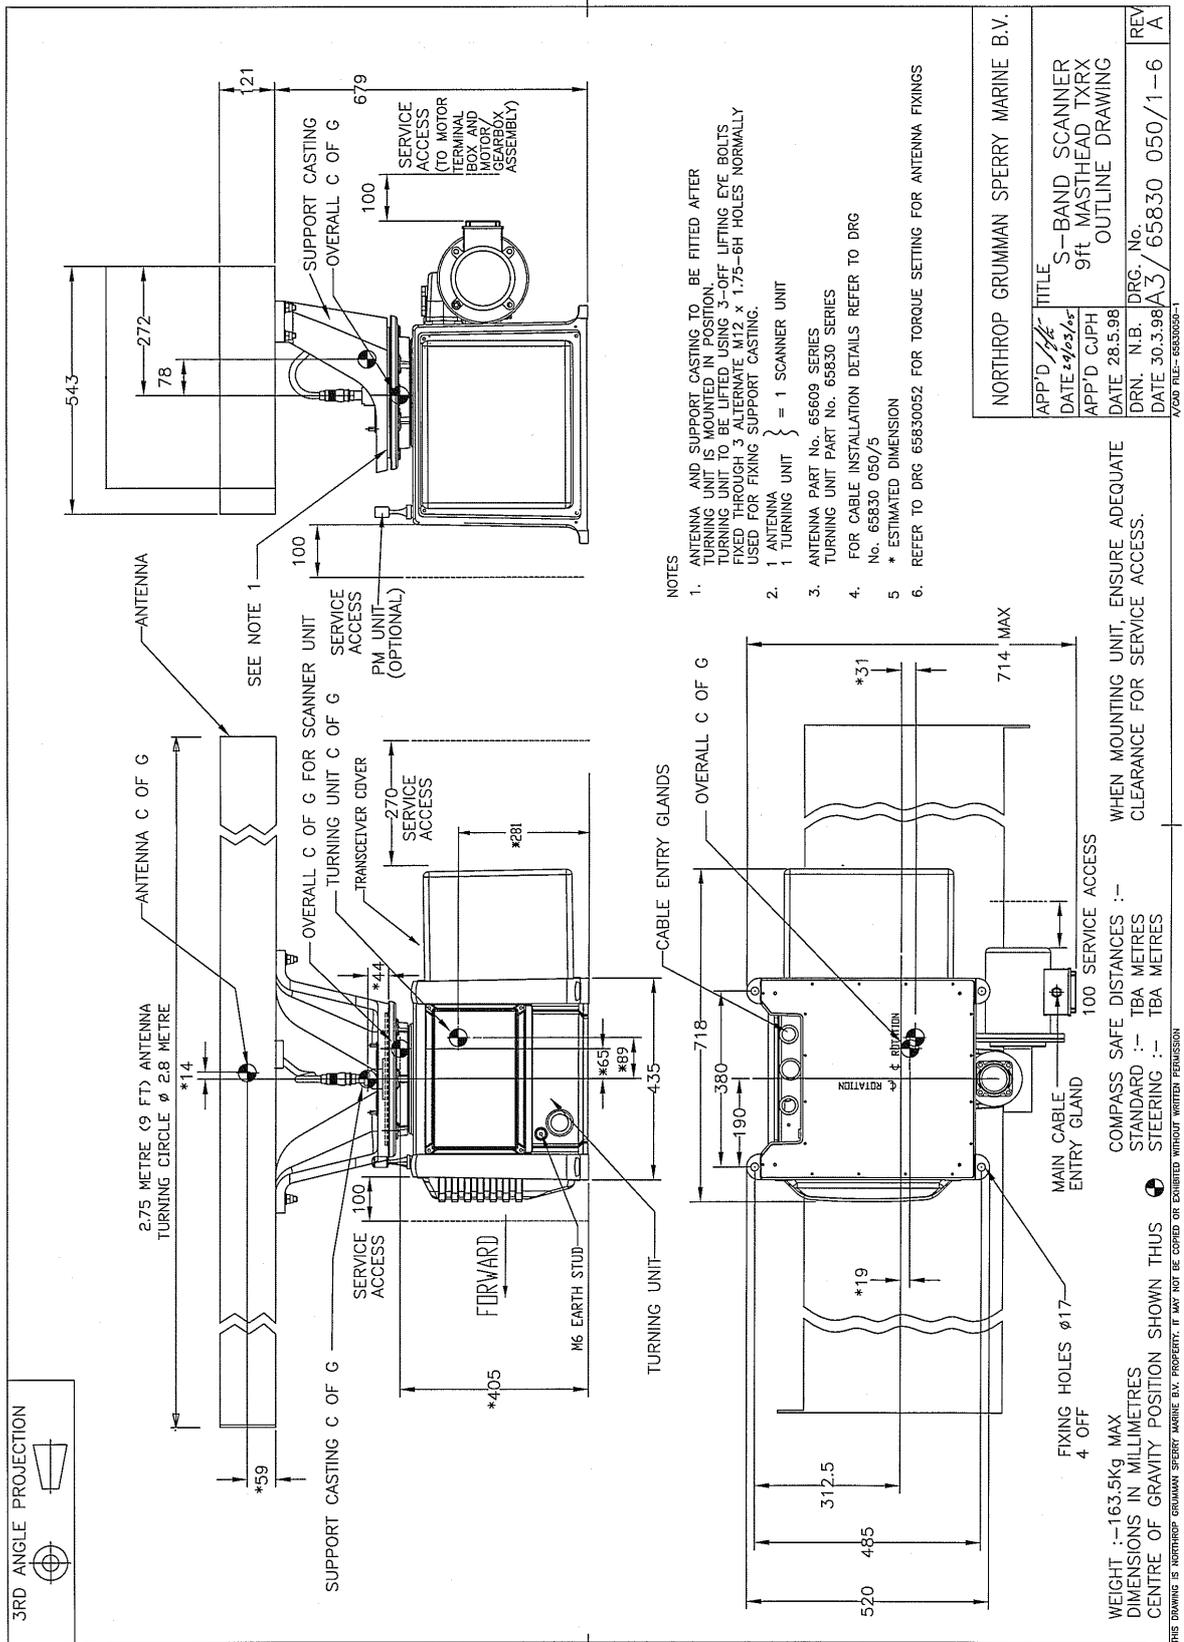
S-Band Scanner 9ft Masthead Tx/Rx 30kW Installation
